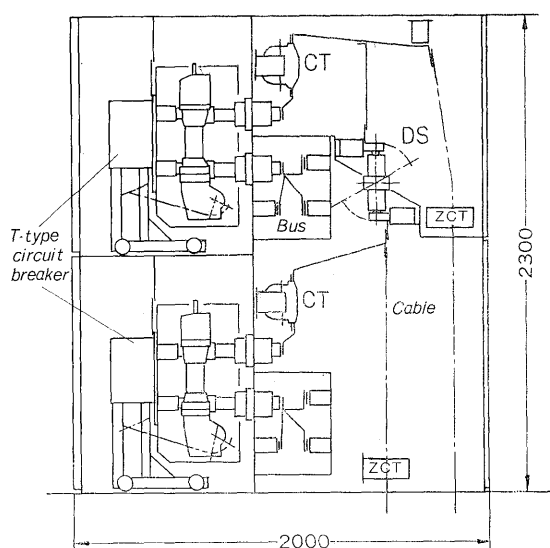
Stacked metal-clad switchgear with modified single bus system
